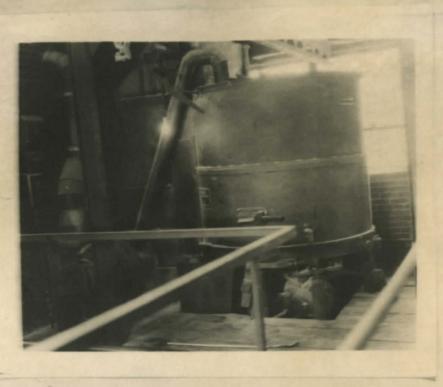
Enclosed and Exhausted Sand Mixer for Mold Batch
